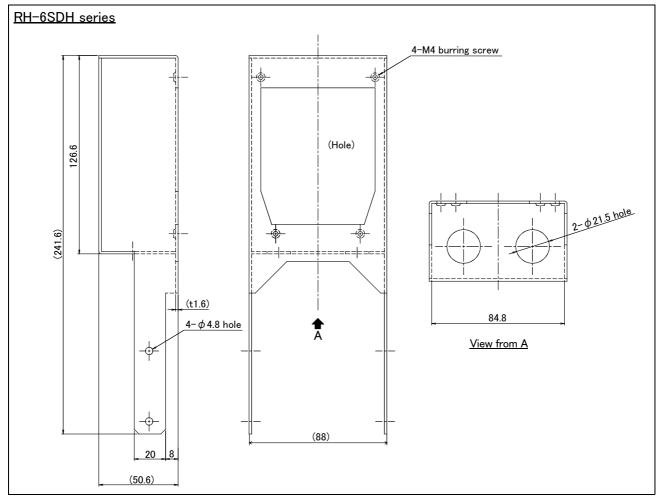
Outside dimensions of solenoid valve box (RH-6SDH series)
